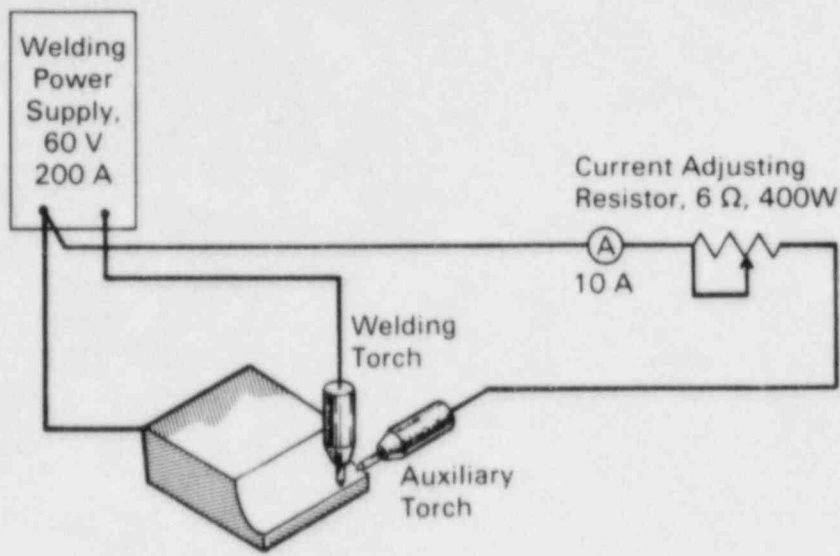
Auxiliary Arc-Starting Method Energized by the Welding Power Supply
